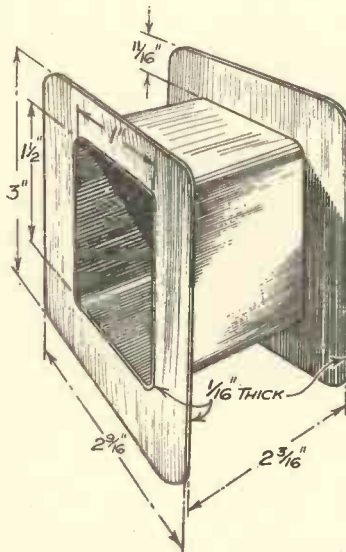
BOBBIN, SHOWING THE DIMENSIONS.
